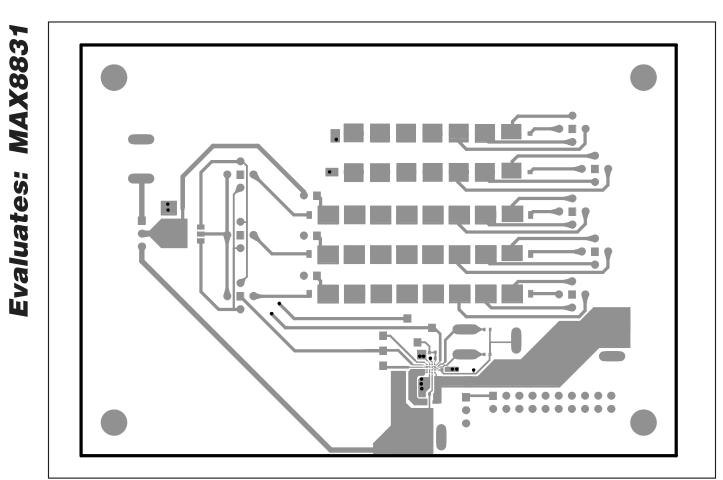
MAX8831 EV Kit PCB Layout—Component Side
